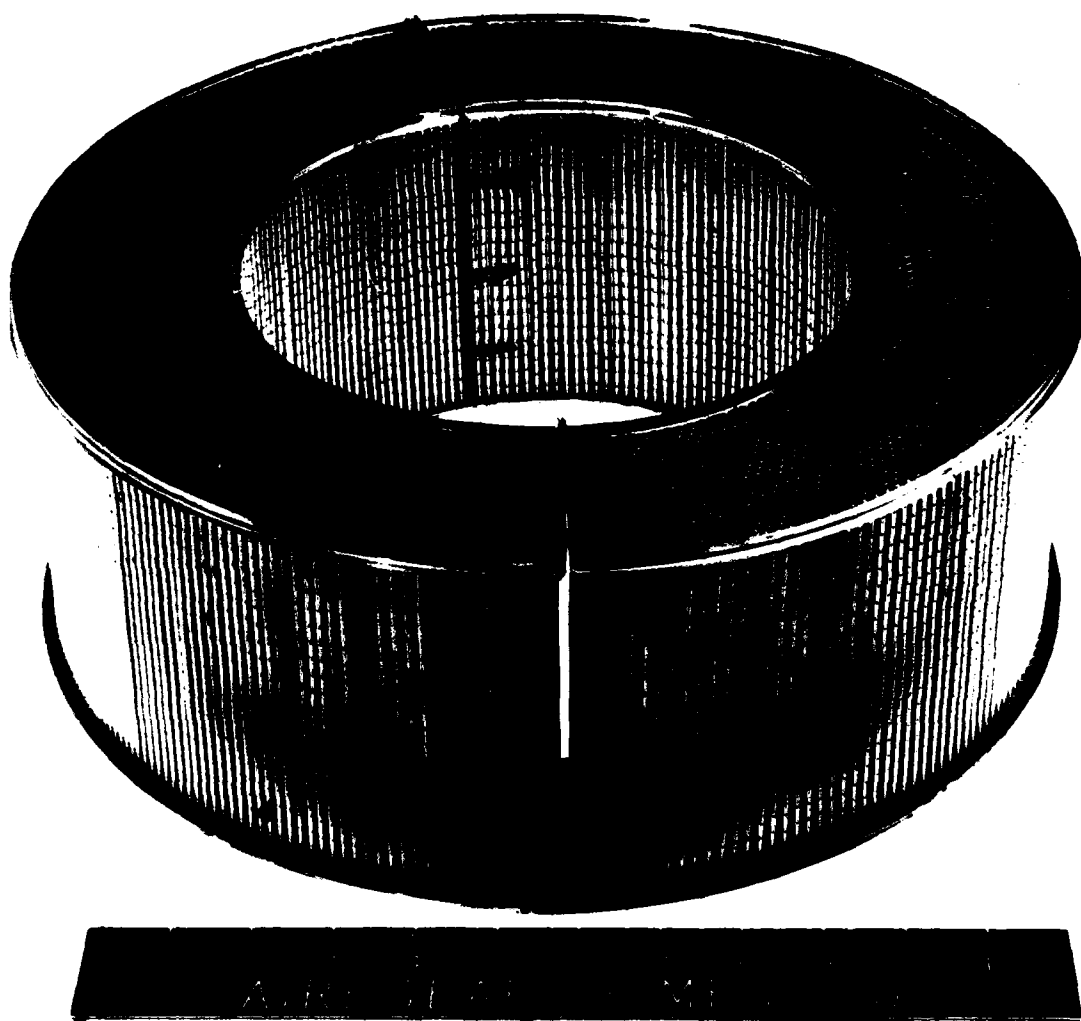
Tubular Regenerator Core Assembly for T63 Engine.
